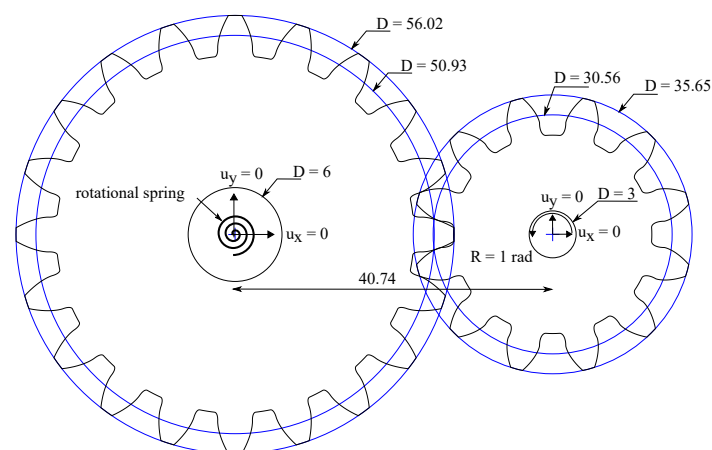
Cracking in interacting gears: geometry, dimensions (in mm) and boundary conditions.
